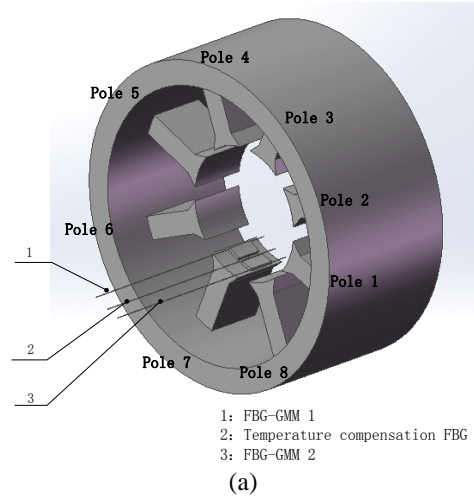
FBG-GMM sensors mounted in a radial magnetic bearing
